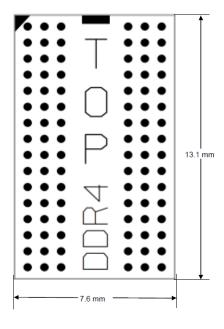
W4631A DDR4 x16 BGA interposer dimensional diagram.
